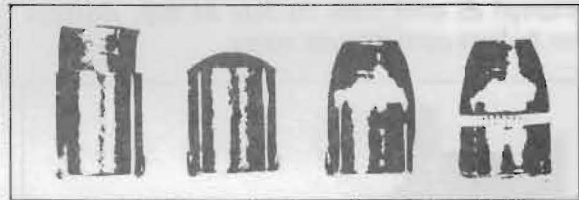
Four stages in making a swaged handgun bullet. From left, gilding metal cup with lead wire core inserted by hand; the cup and core after core seating in die; the bullet after swaging; finished bullet, complete with cannelure.
